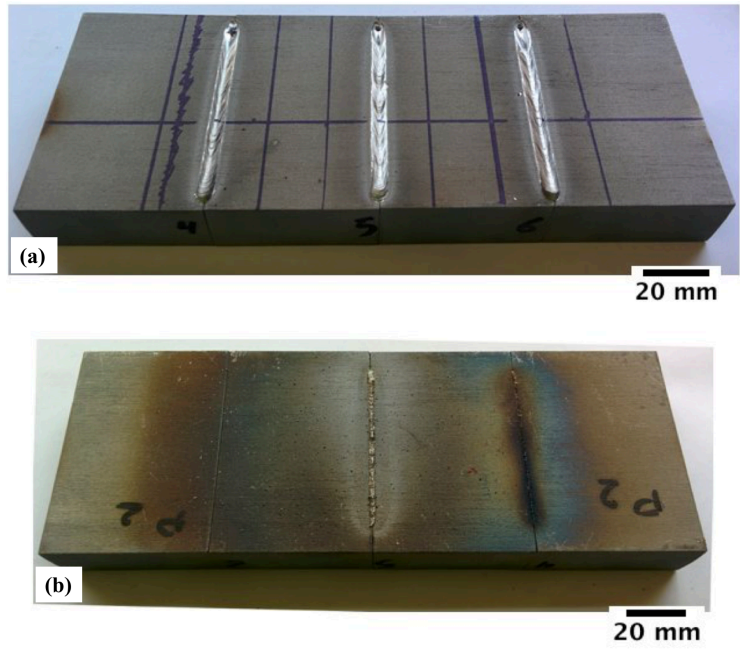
First butt joint welds. Joints 4to6, (a) top surface (b) bottom surface.
